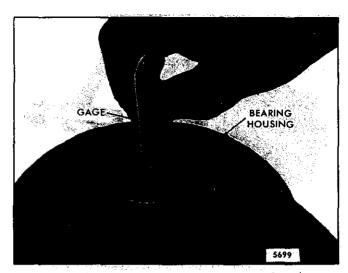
Checking Turbine Seal Ring Gap in Bearing Housing
